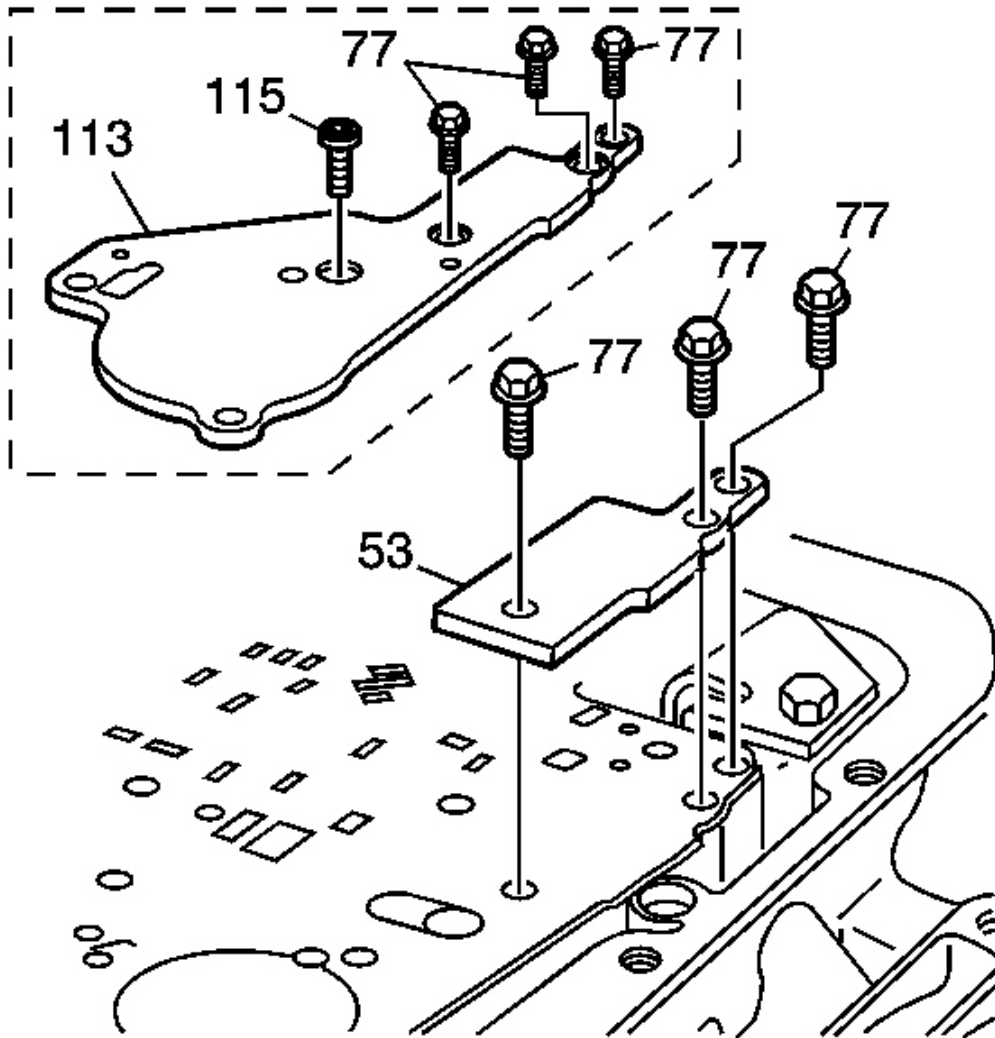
View Of Spacer Plate Support Plate & Bolts
